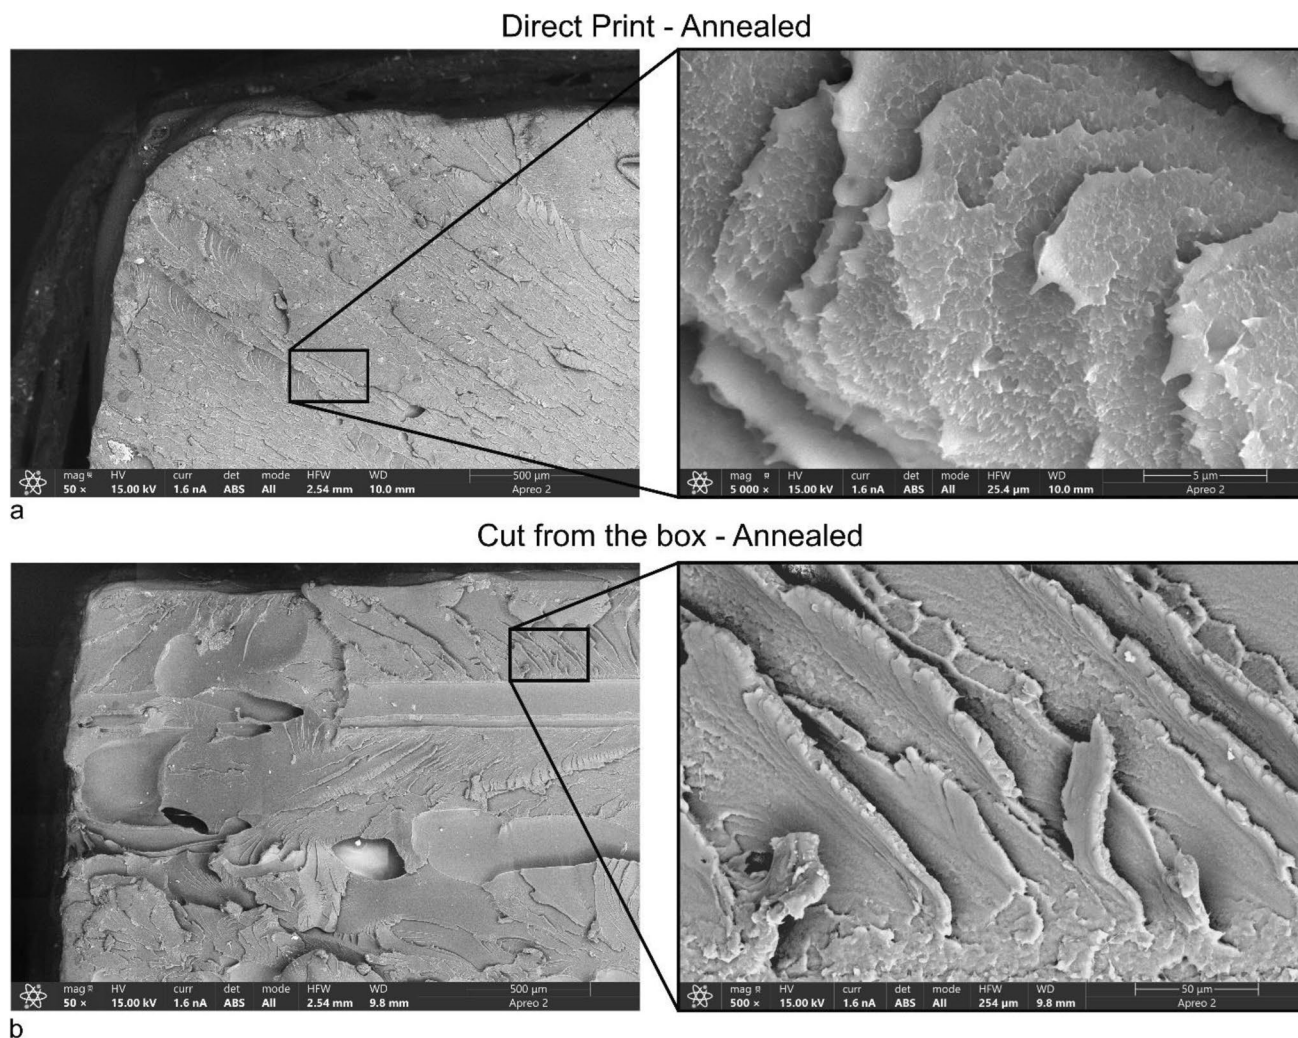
Fracture surfaces observed through SEM of a directly printed and b cut from the box samples both after annealing posttreatment
